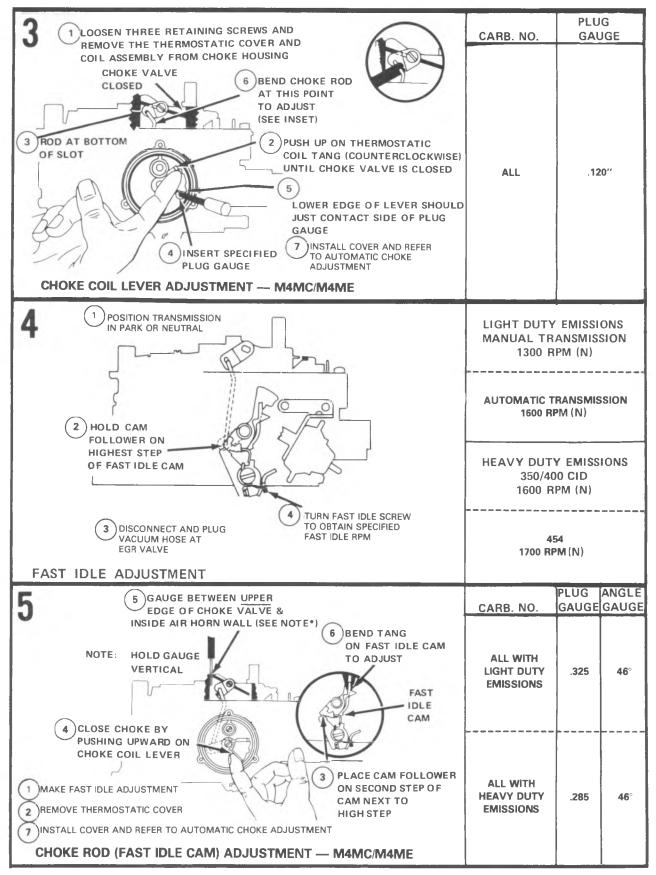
C-48--M4MC/M4ME/4MV Carburetor Adjustments - 2 of 8
